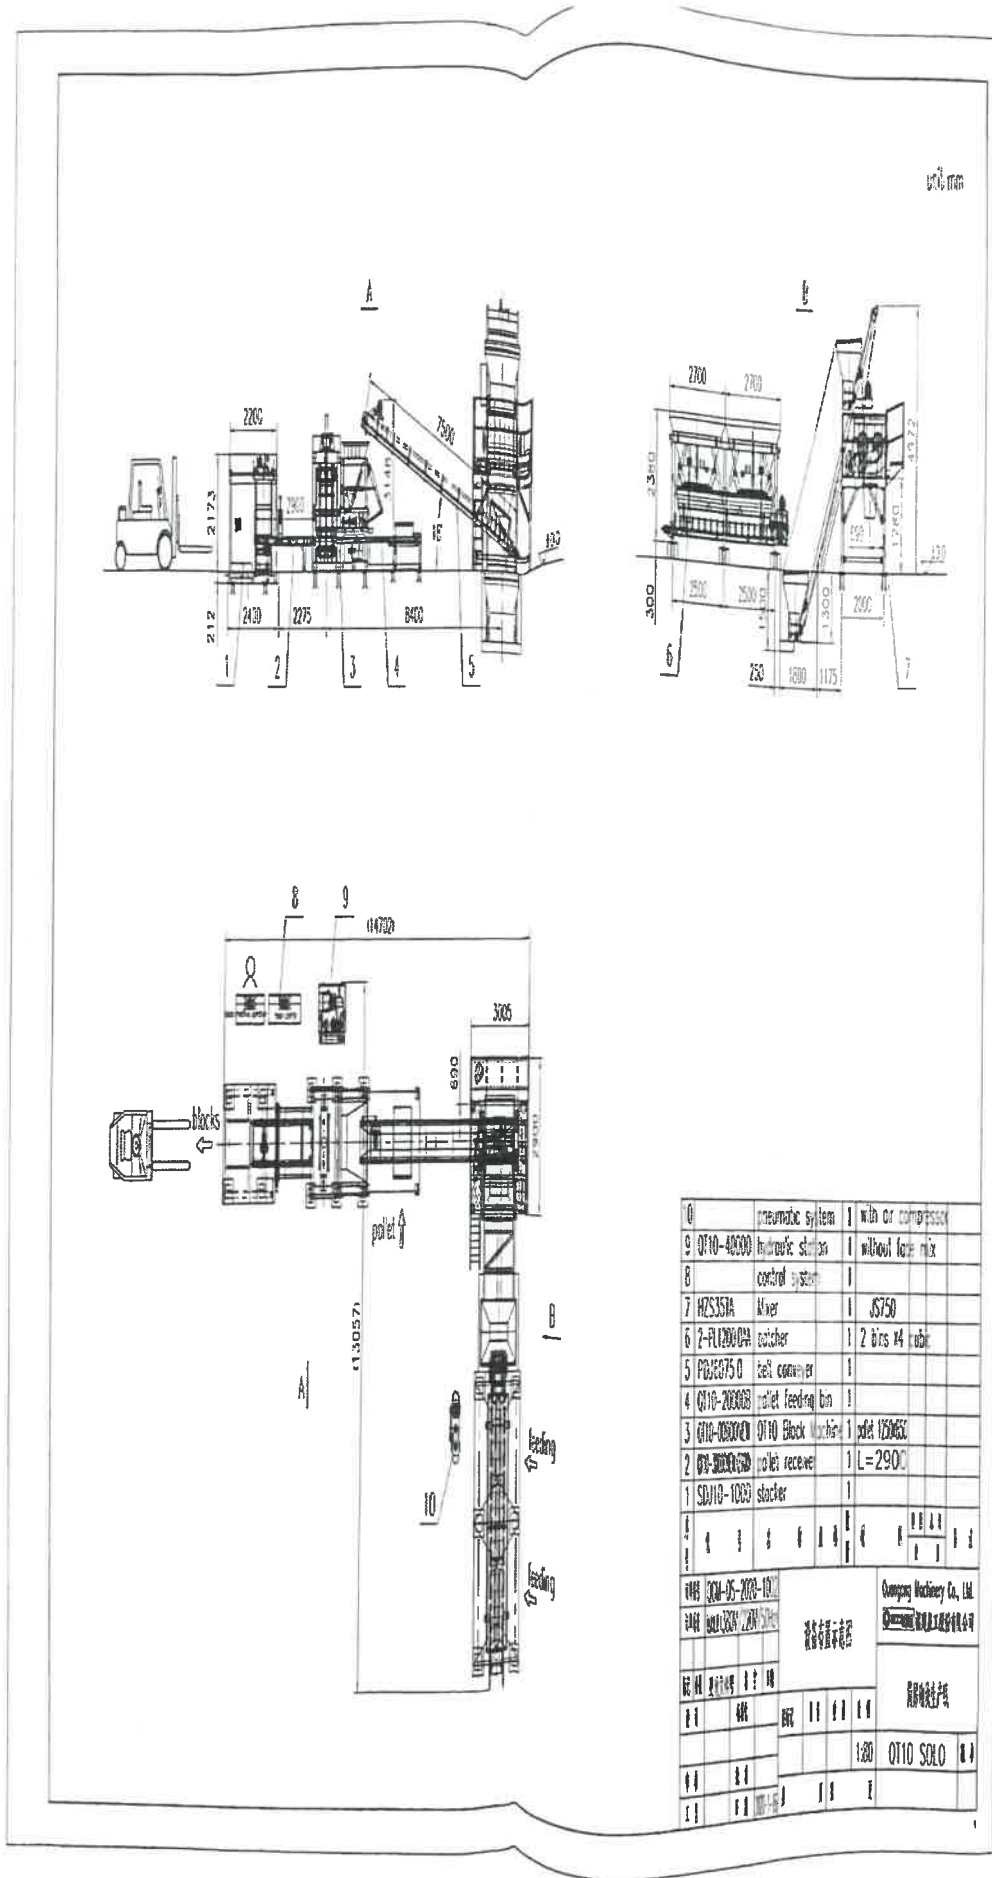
The diagrammatic layout of the proposed brick manufacturing plant for Real Properties CC at Onanime Village.
